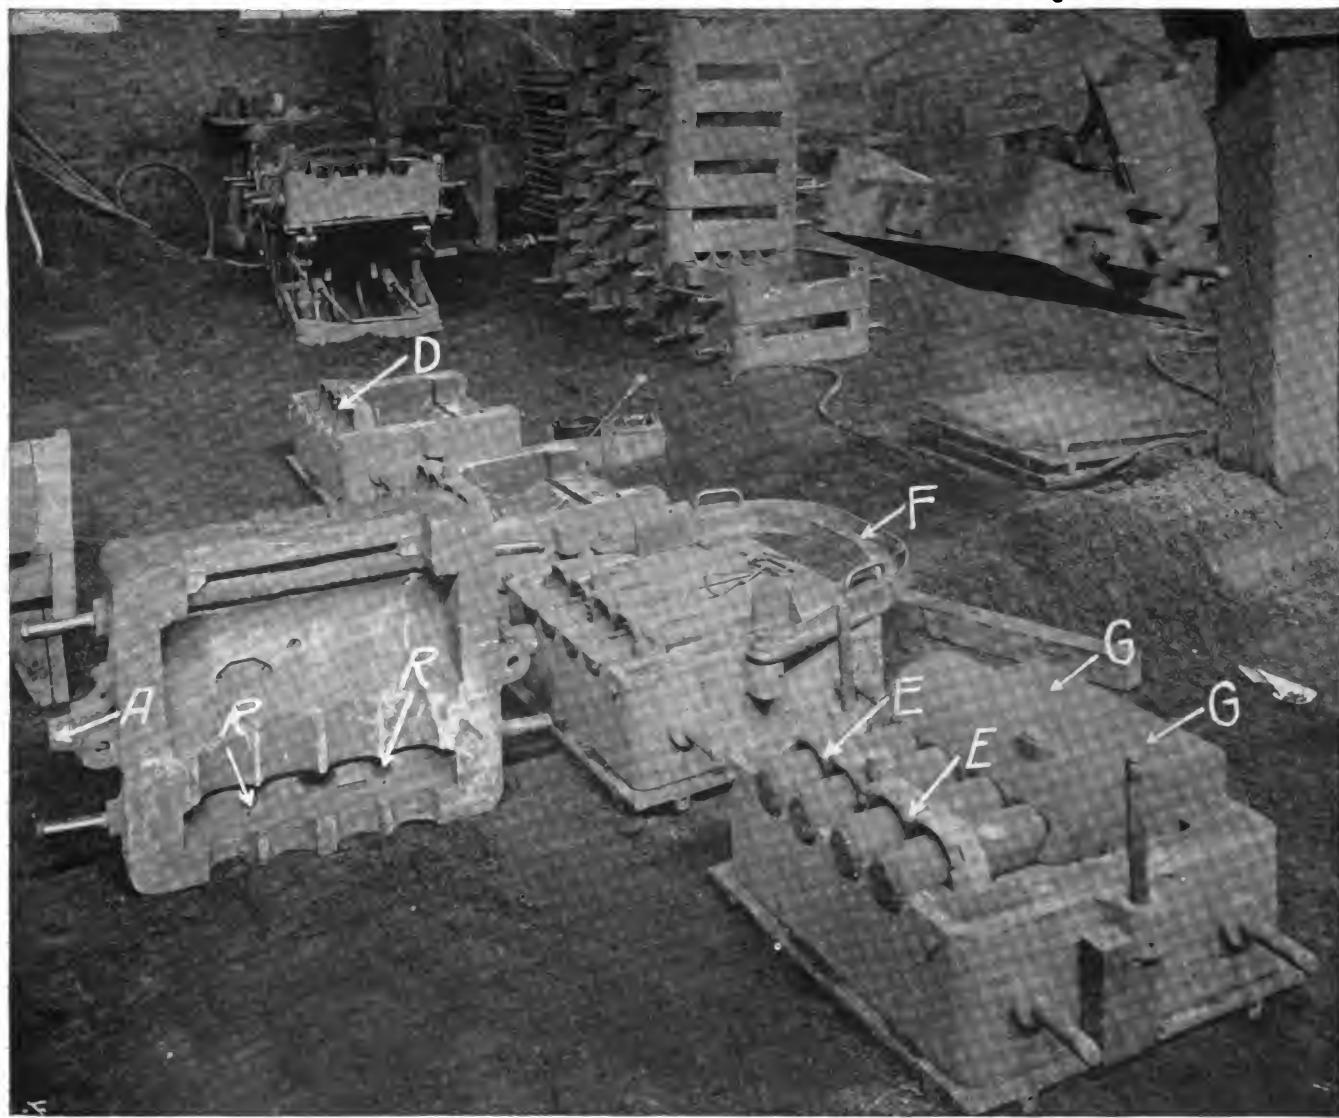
Layout for molding the cylinders shown in Fig. 2—the machine used for molding the drags is in the background
